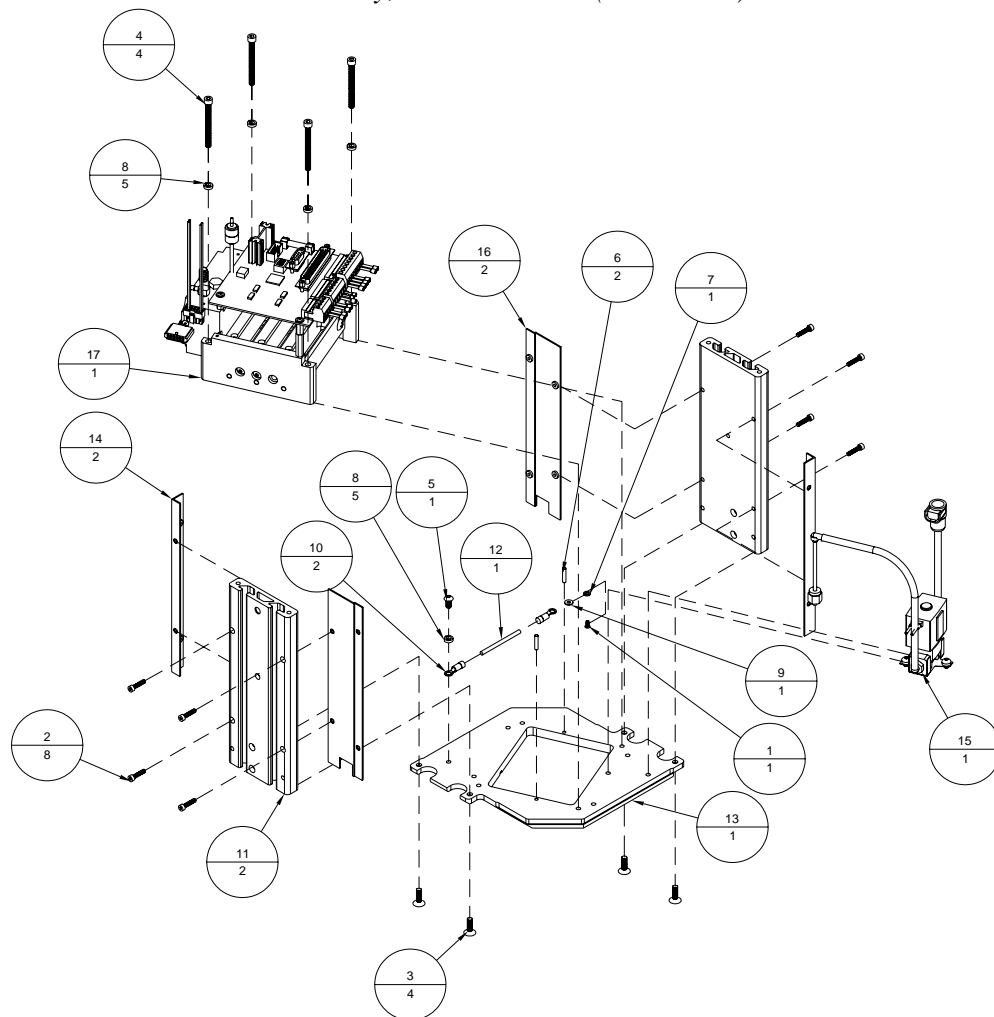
Bottom Plate Assembly, Cezanne 2250 (9105159A)
